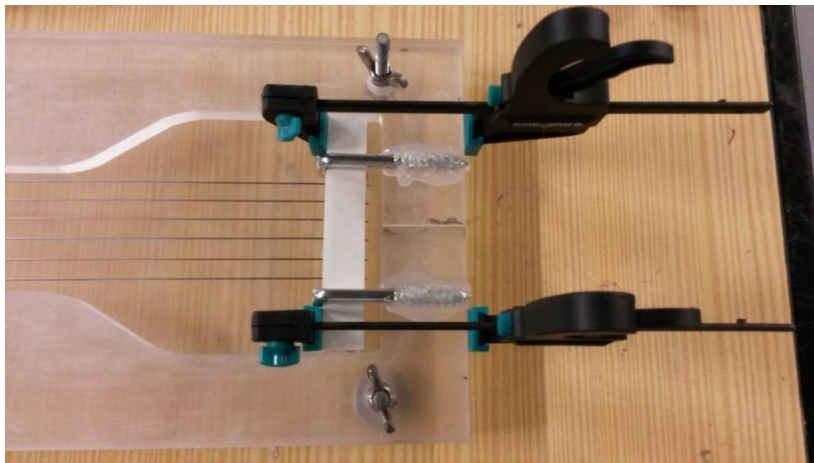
Plastic plate fixed at the edge of the mould using mechanical devices to stretch and hold it, while the “L” screws were fixed to the mould using hot glue.
